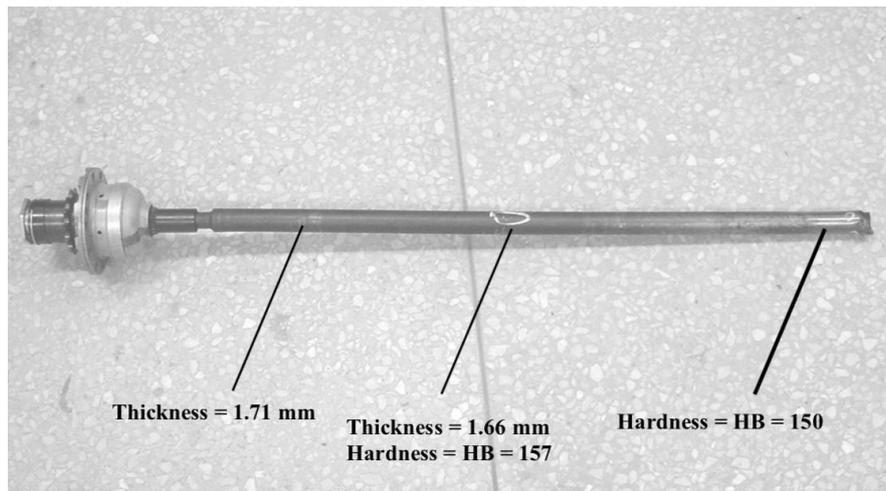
Hardness & Thickness Measurements of a Fractured Piece
